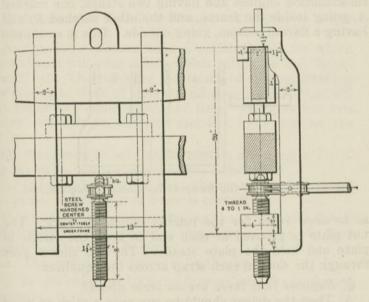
Clamp for Removing Gib in Spring Equalizer.
